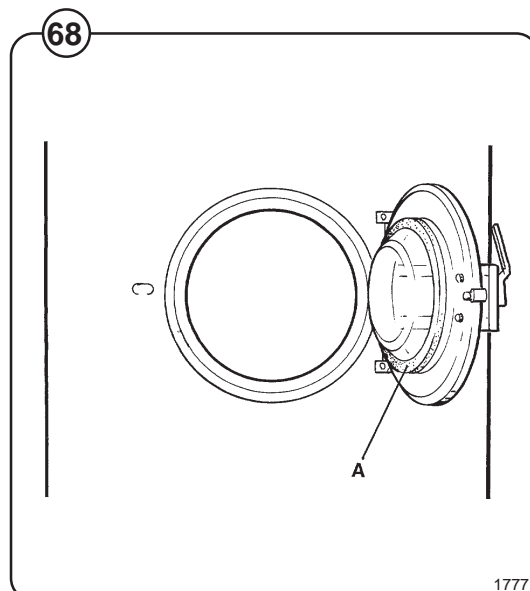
Check door gasket. If gasket is in good condition check the tension, between door gasket and door frame and adjust.
